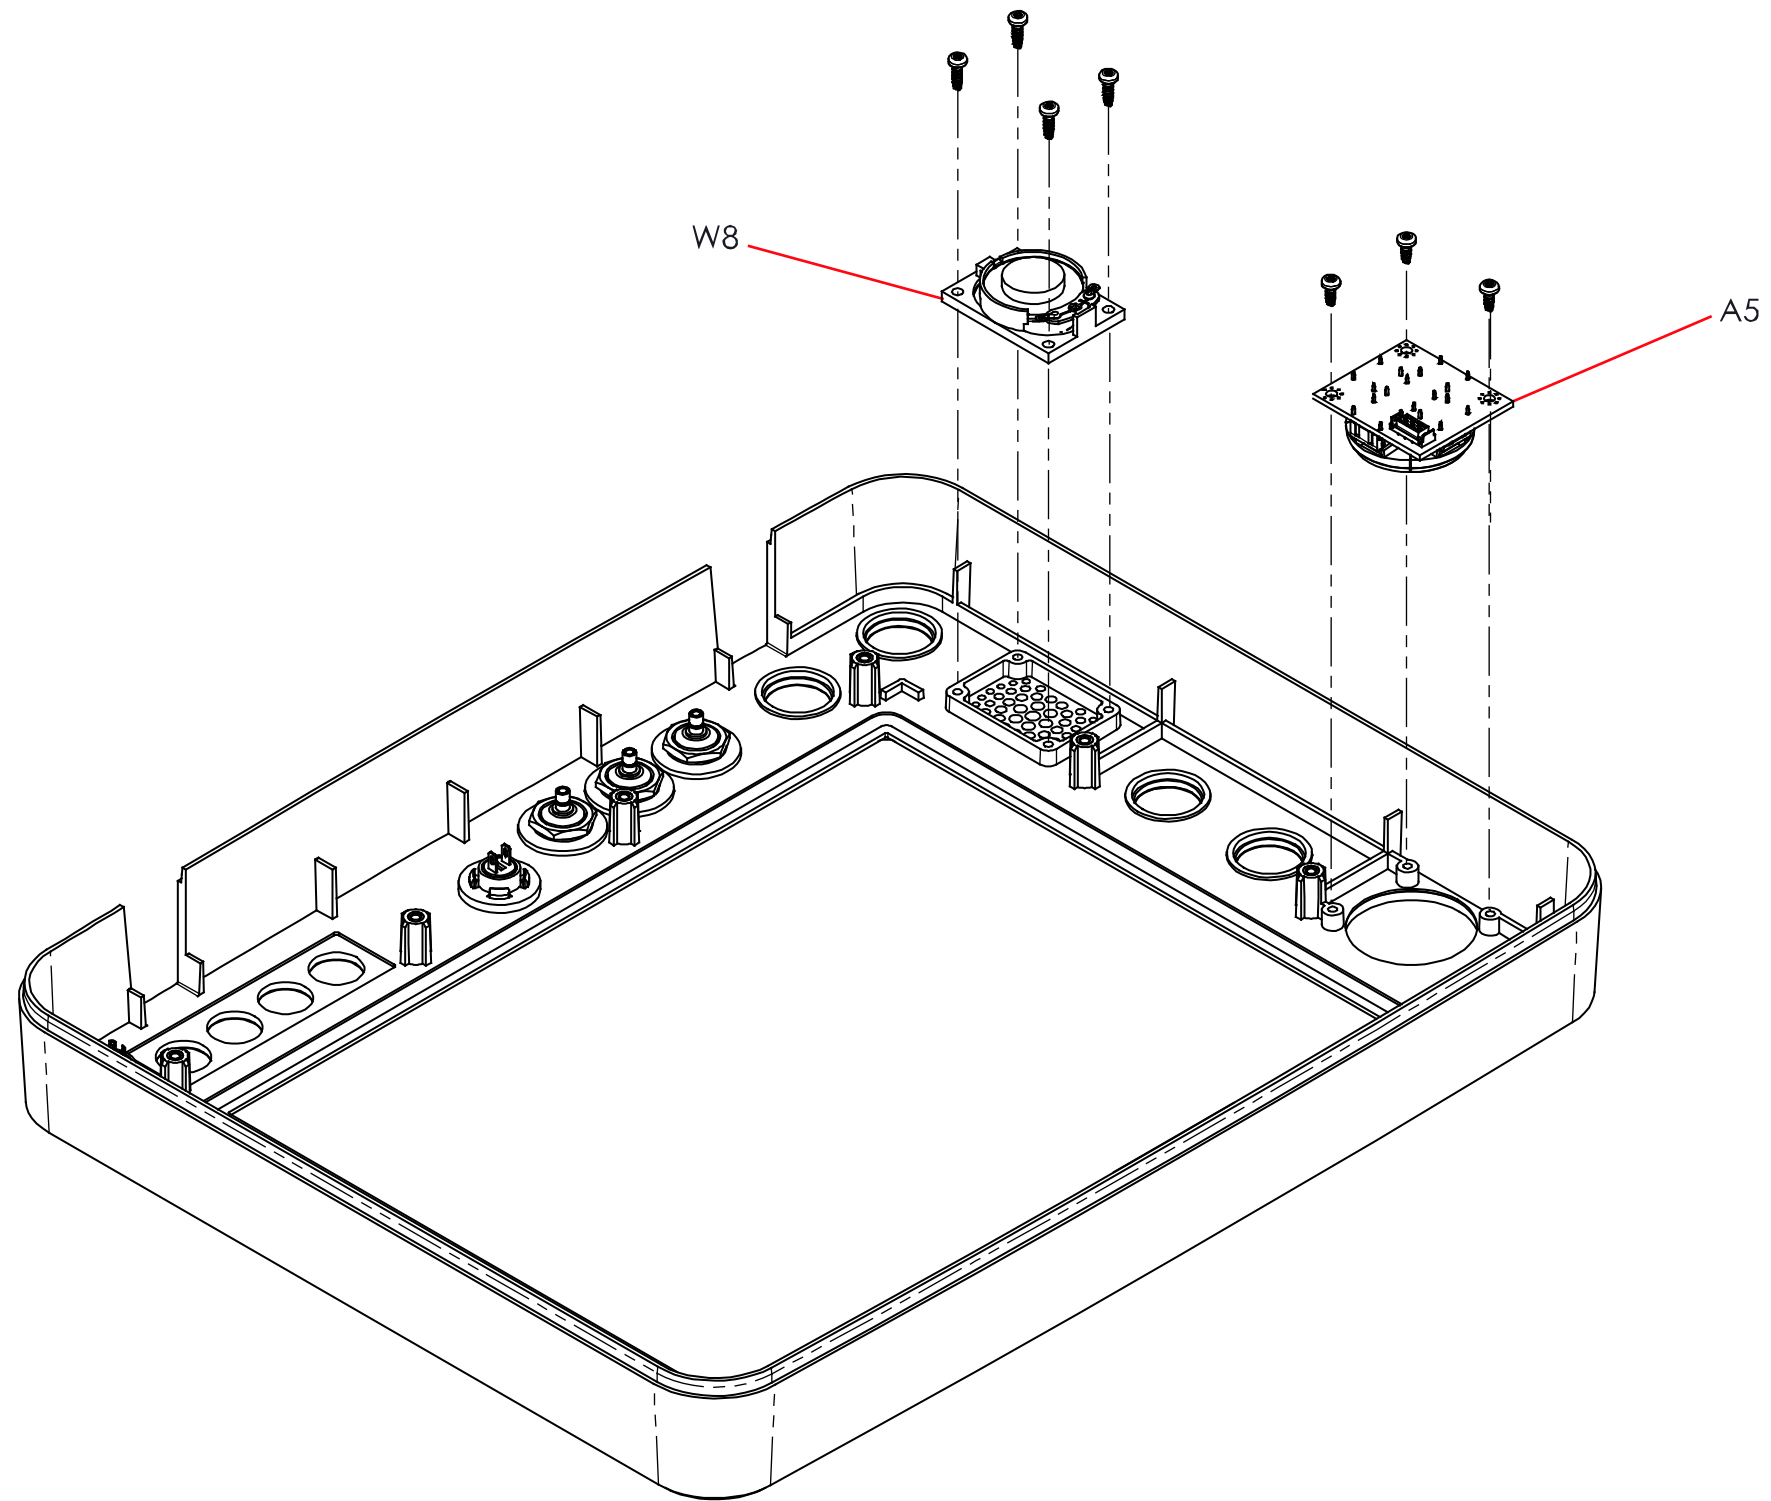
Front Chassis / Panel Assy (Sheet 2 of 6)
